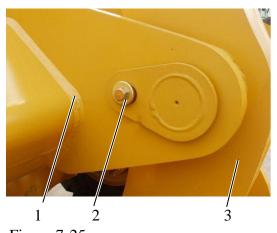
1 Boom 2 Bolt 3 Rocker arm
